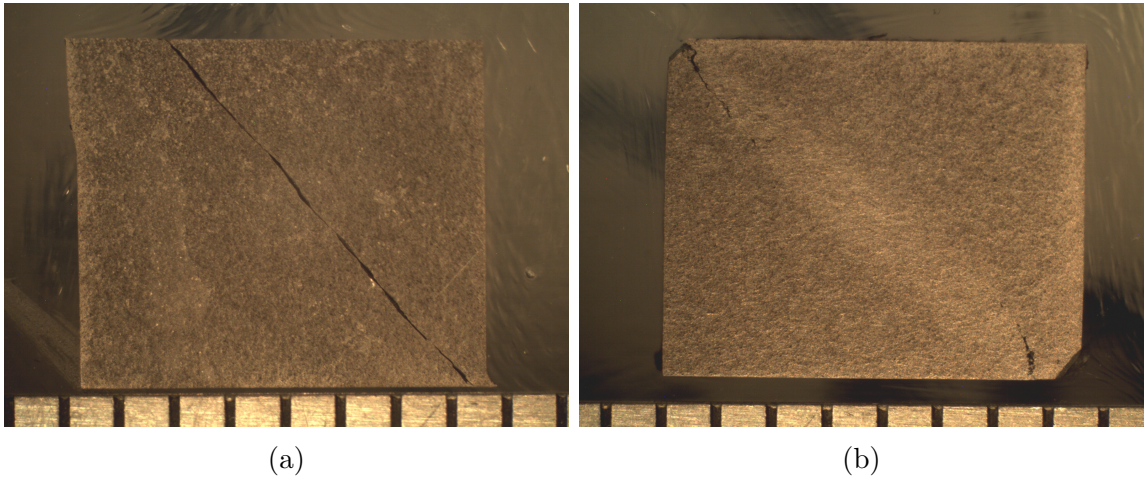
(a) Compression sample which formed a shear crack without a cracked band of material. (b) Compression sample which formed with a *shear band* of cracked material prior to complete failure. The scale is in millimeters.
